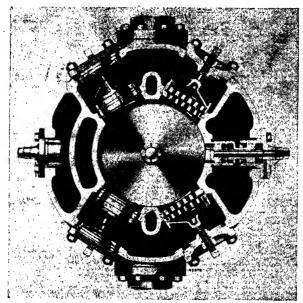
End view showing water jackets, inlet and discharge chambers, and clearance pockets. (Courtesy of Ingersoll-Rand Co.)
